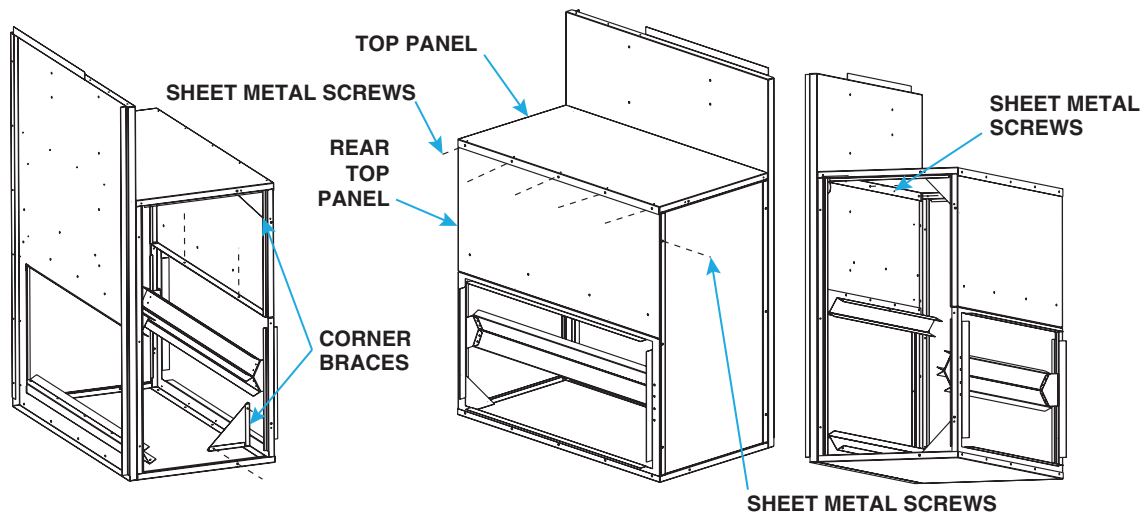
Install Horizontal Inlet Filter Cabinet on Heater
